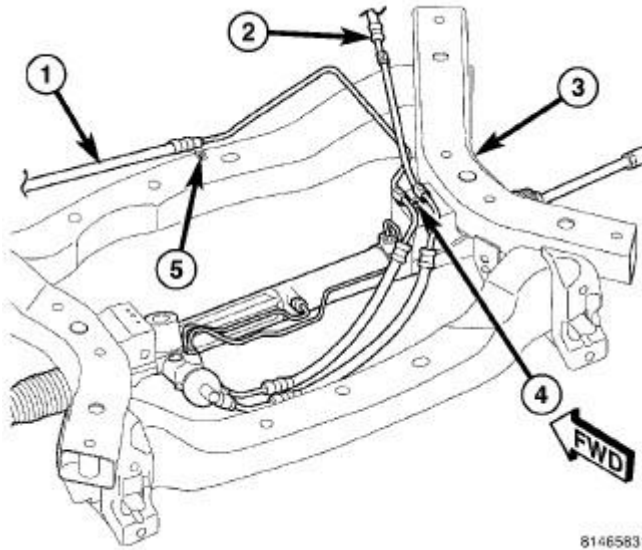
HOSE ROUTING ALONG ENGINE CRADLE
